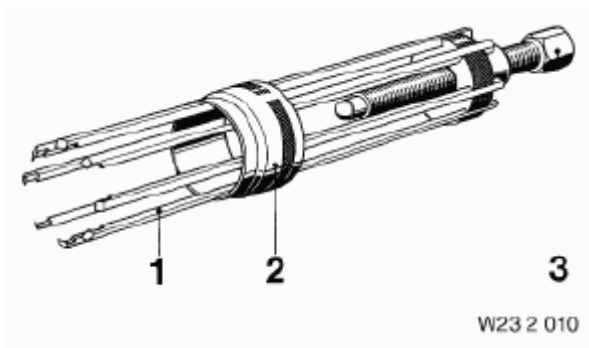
Rellex Ball Bearing Extractor 6206 E (23 2 010)
